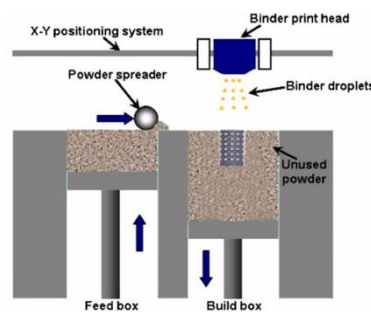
Schematic drawing representing the 3D printing process. Adapted from [103].
